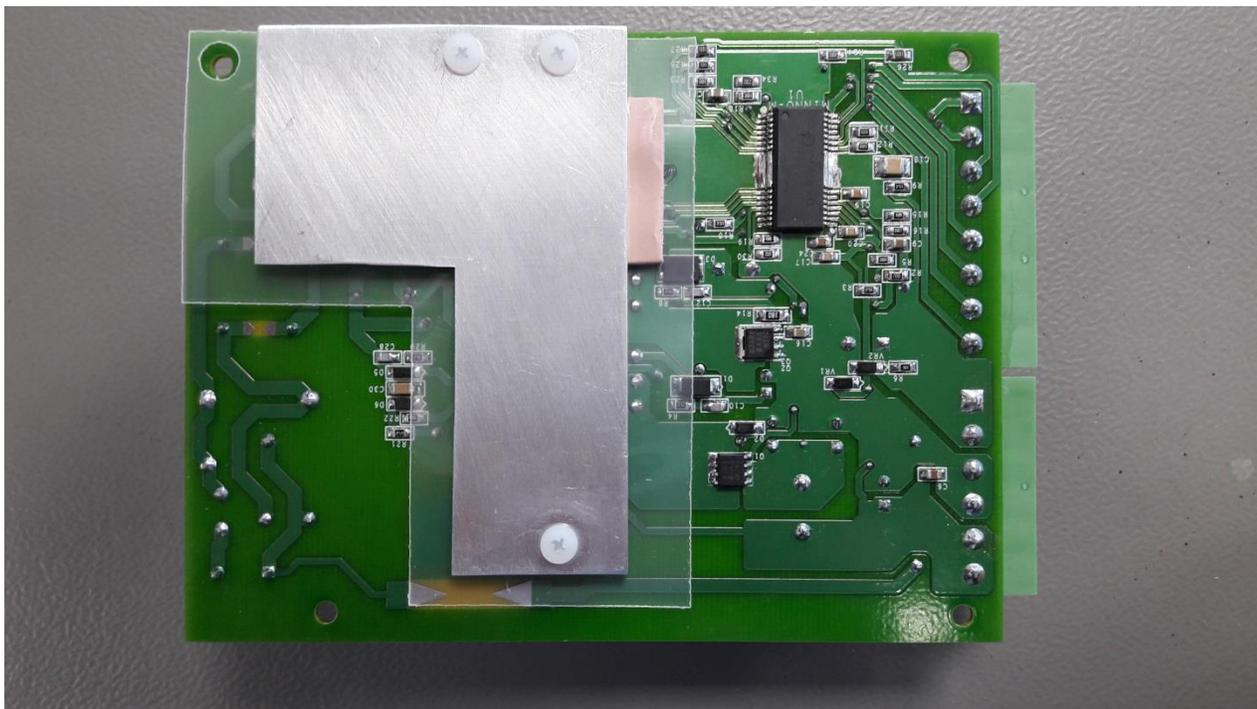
PCB Assembly – Bottom View, with Heat Sink.
